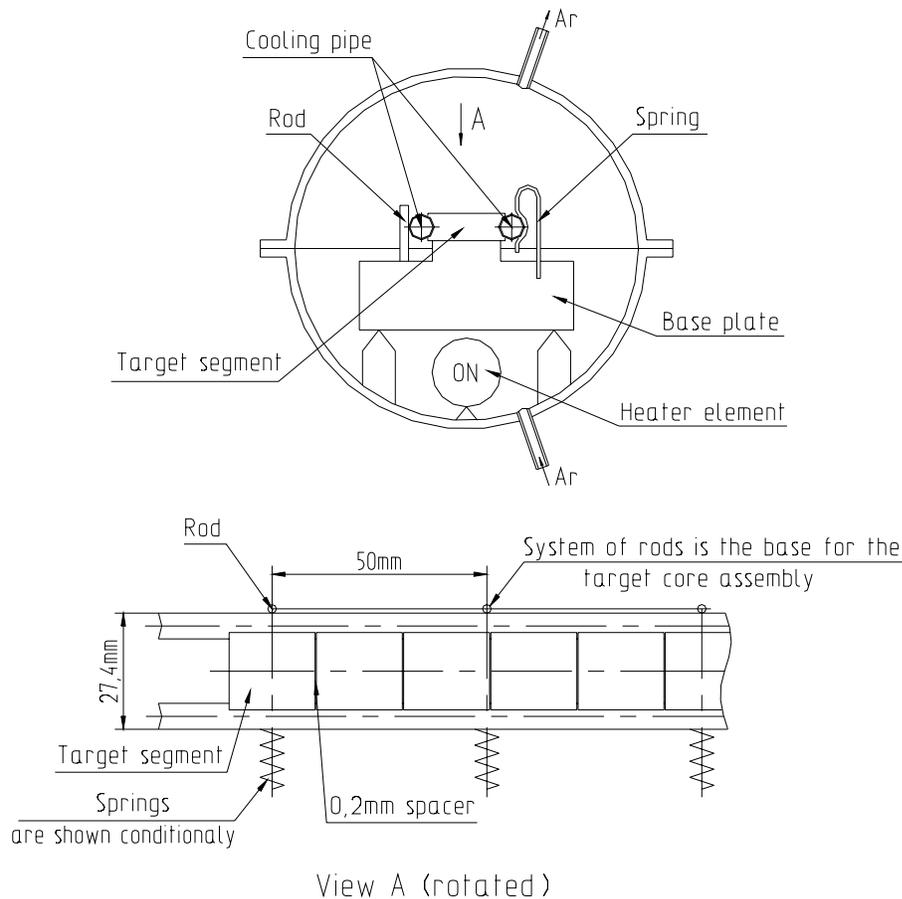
The assembly of the target core in the soldering furnace during the process of soldering.
